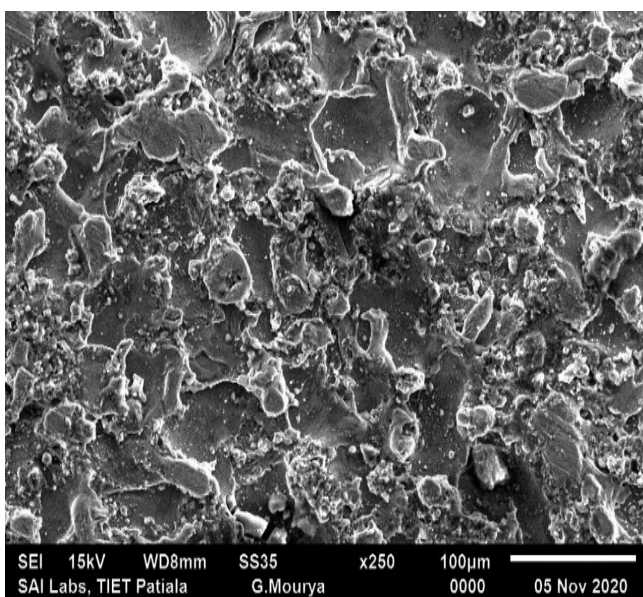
SEM Image of machined surface as per best setting for minimum overcut
